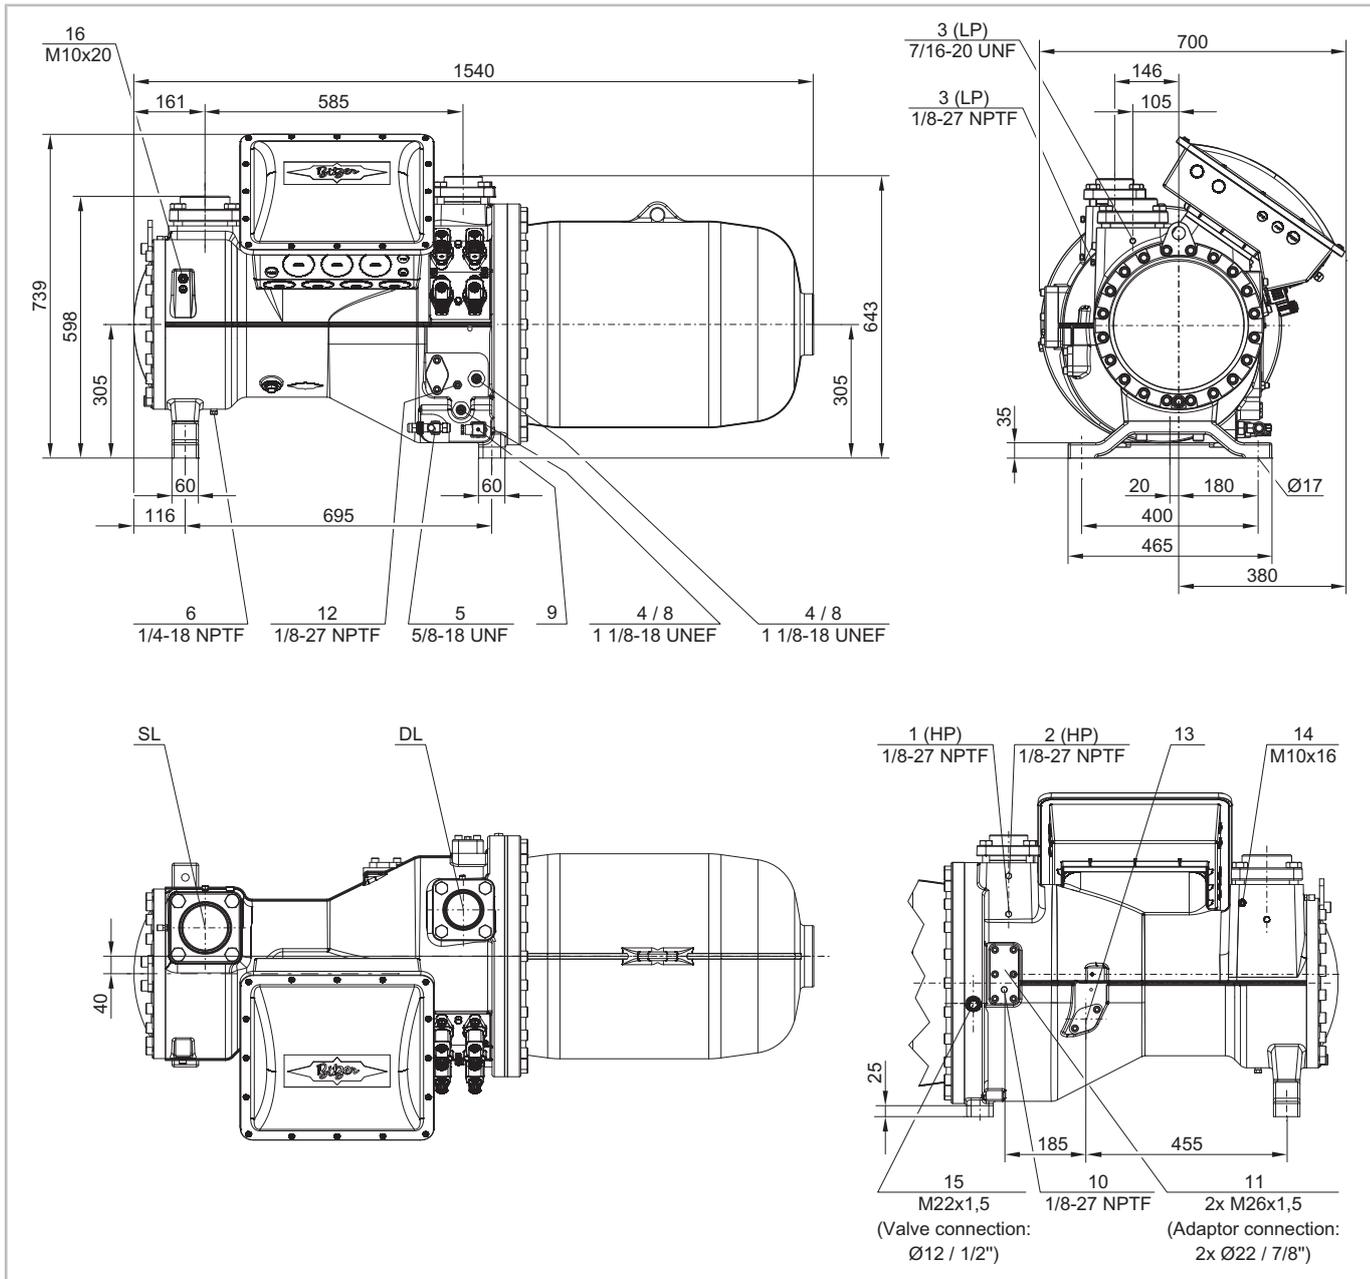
Dimensional drawing CSH8553-80Y .. CSH8593-180(Y)
